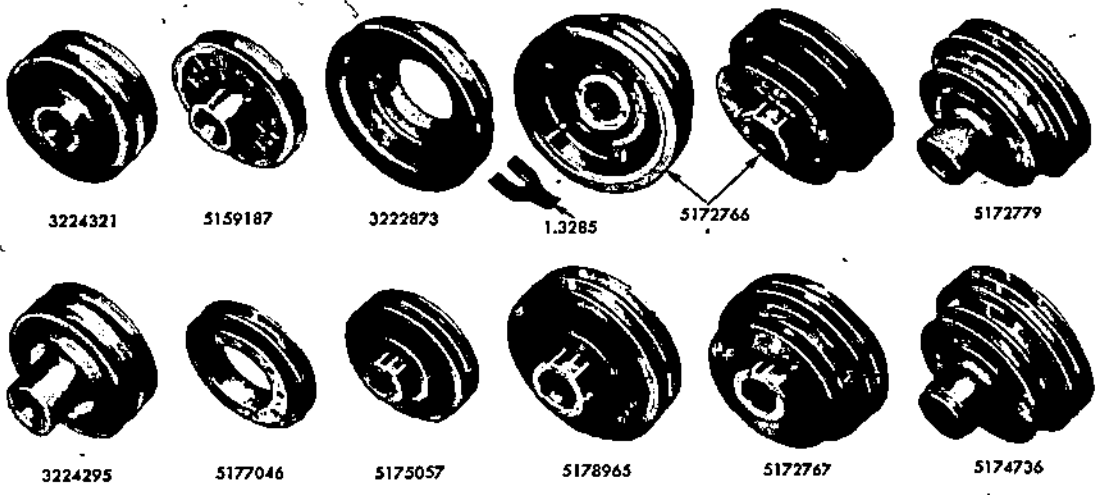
Crankshaft Pulley (Item 1.3280)
